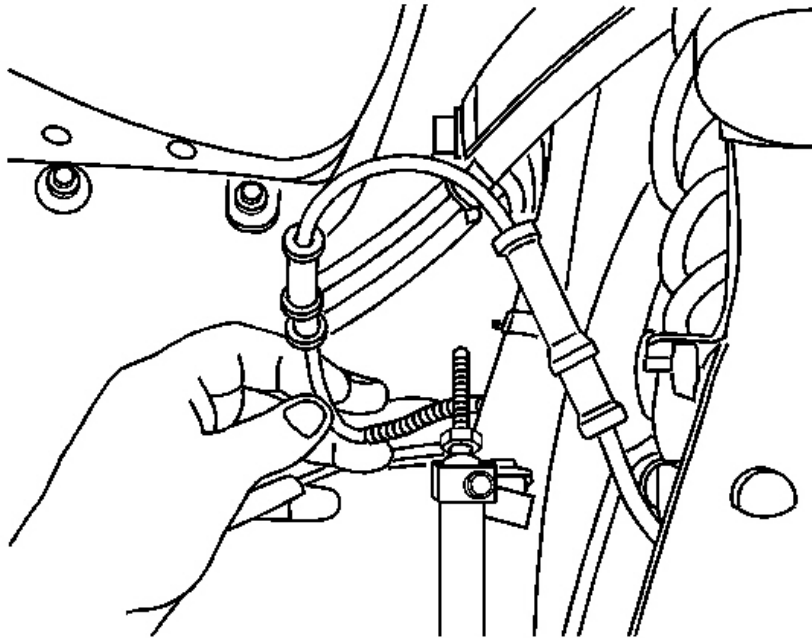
Identifying Wheel Speed Sensor Wiring Harness
